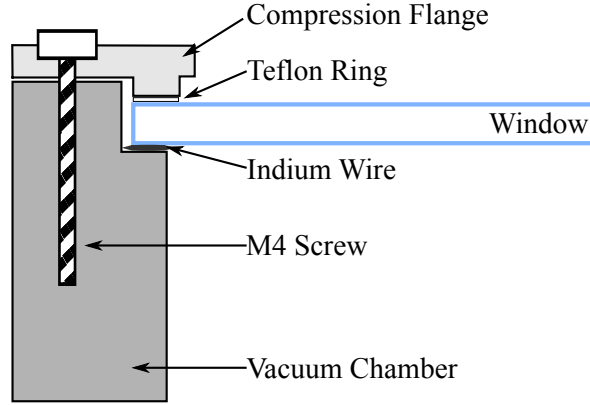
Diagram showing the indium sealing technique as implemented in this experiment. The compression flange, Teflon ring and screw are removed after baking, allowing the tapped holes to be used for mounting optics directly to the chamber.
